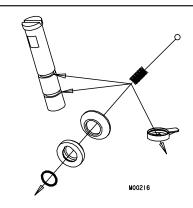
Clean O-ring grooves, seal and nozzle with brush.
